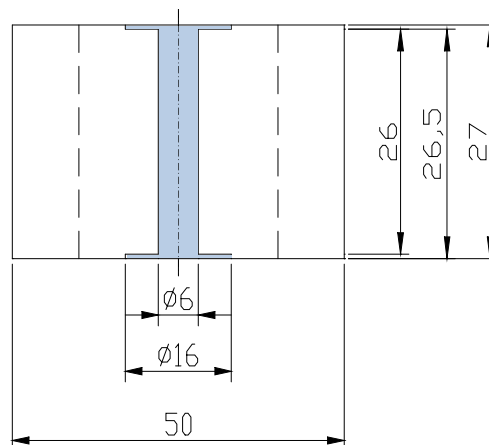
Geometry of “I” shaped mould used [Wanigasooriya 2006]. All units shown are in millimeter (mm).
